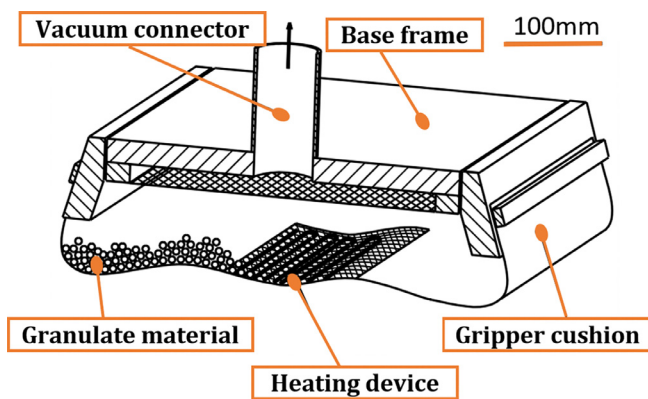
Form-flexible handling and joining technology (formhand) for the forming and assembly of limp materials, adapted from [128].
